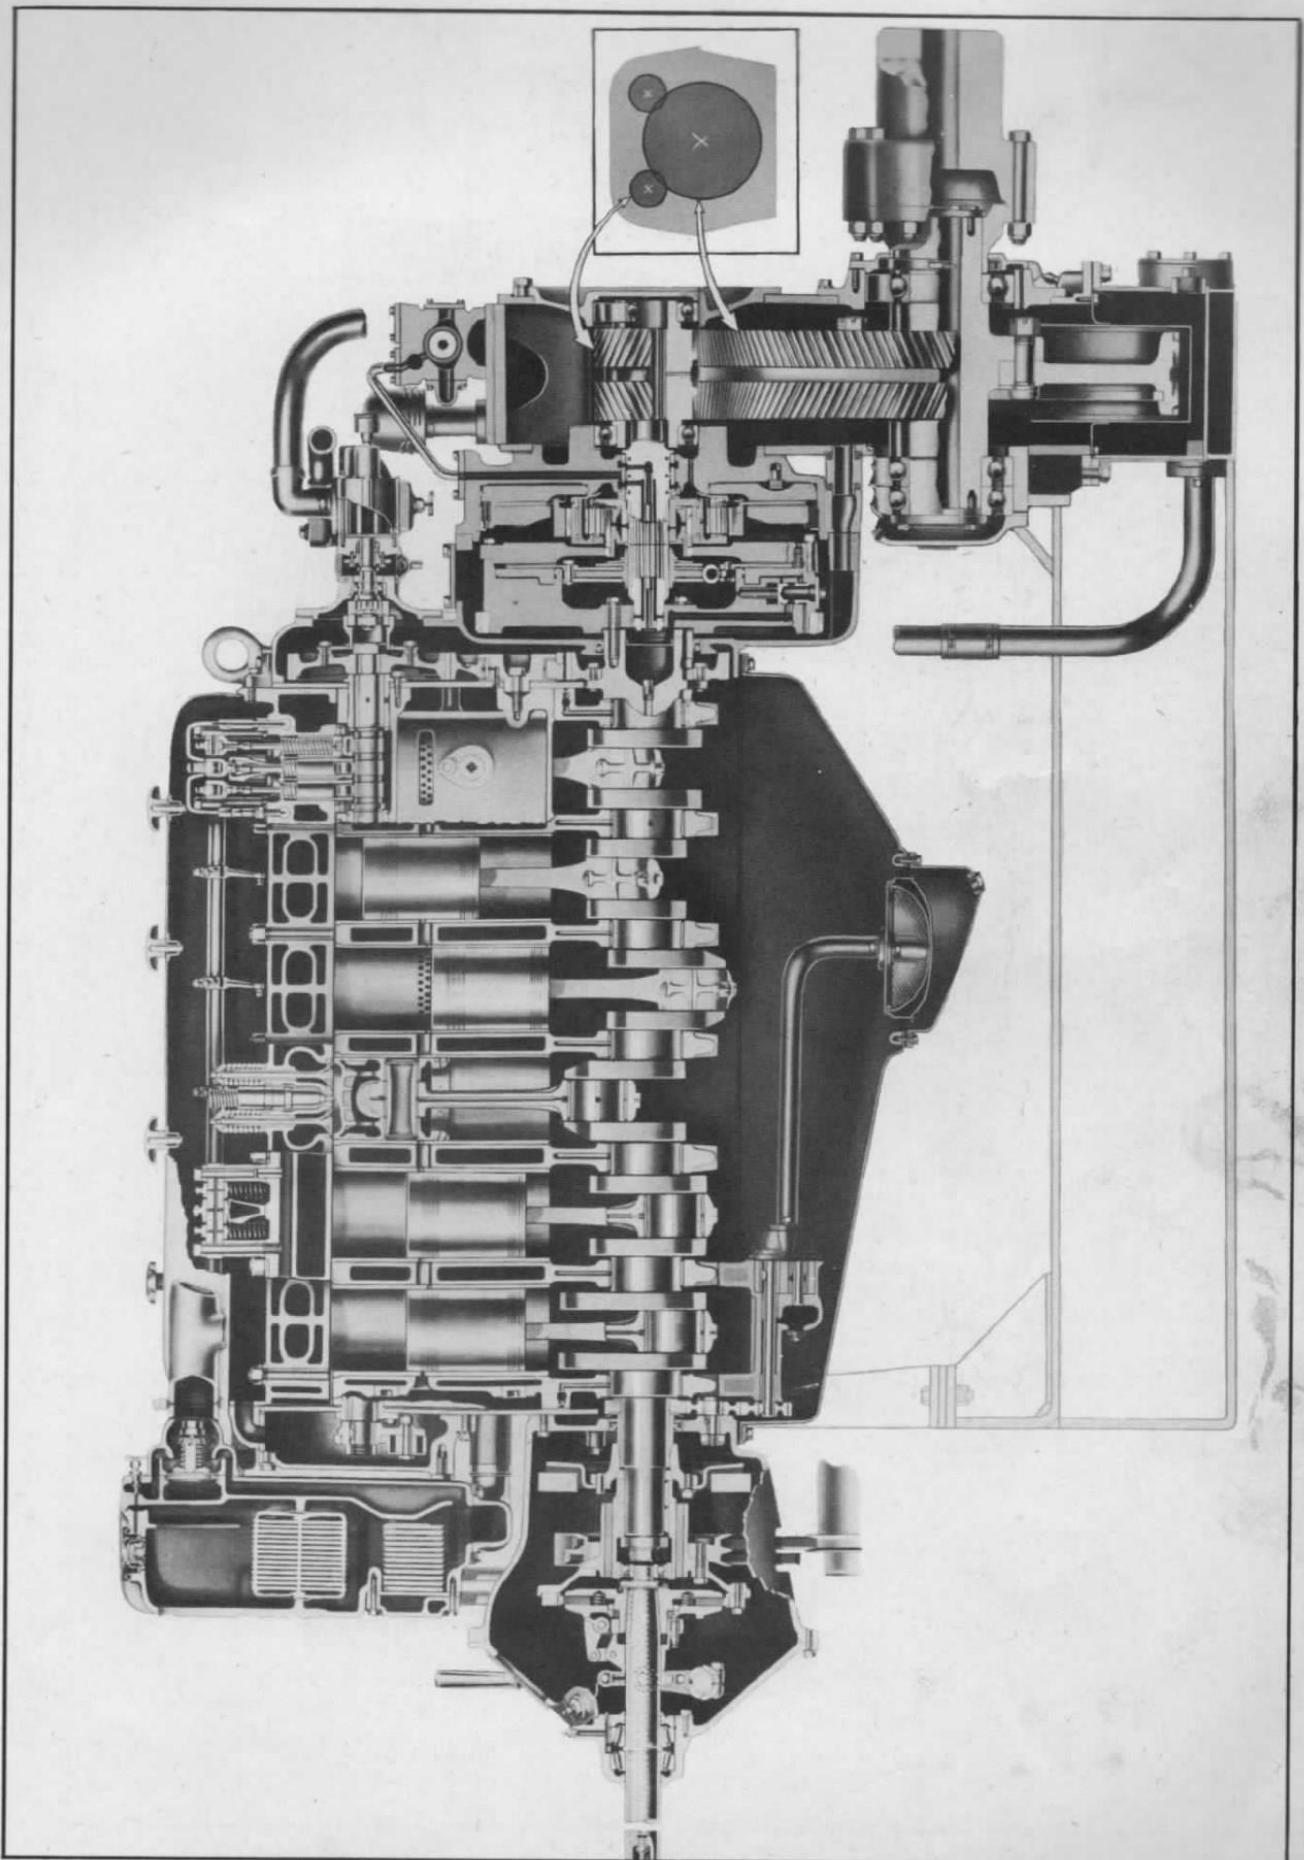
Side Cross Section of Hydraulic Marine Reverse Gear and a Reduction Gear Applied to a Twin Six-Cylinder Unit
